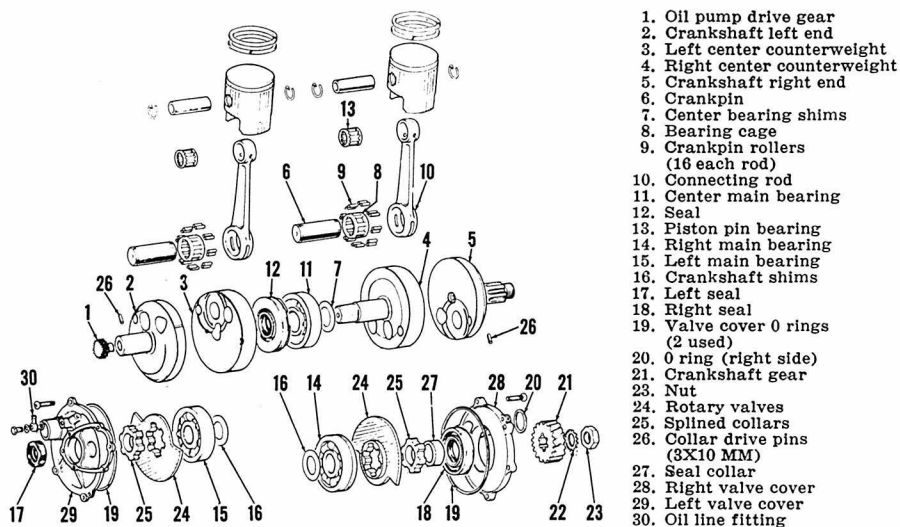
Exploded view of crankshaft assembly and rotary valves. Refer to Fig. BS3-24 for valve timing.
